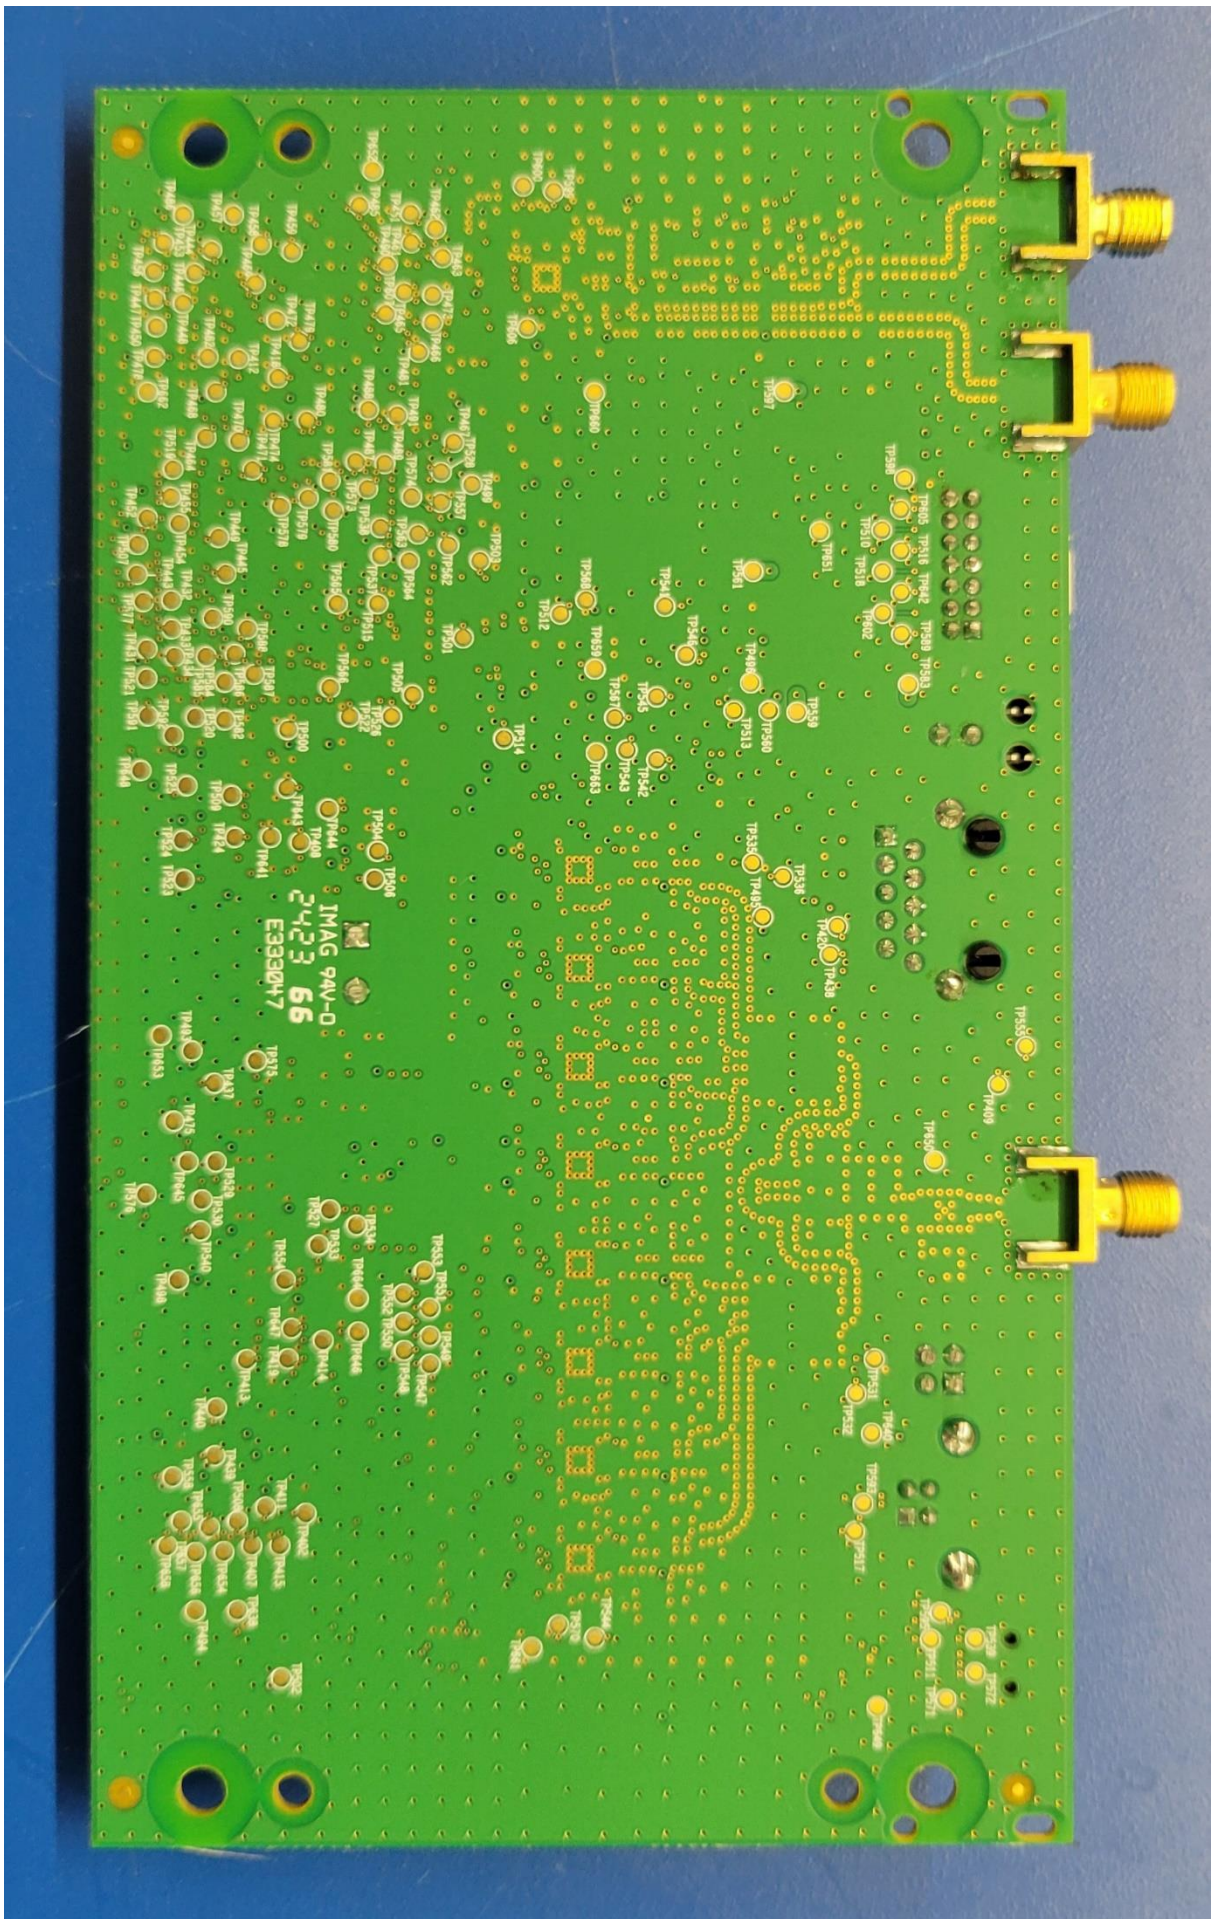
MHz Radio Board: Component Side: Shields Removed
